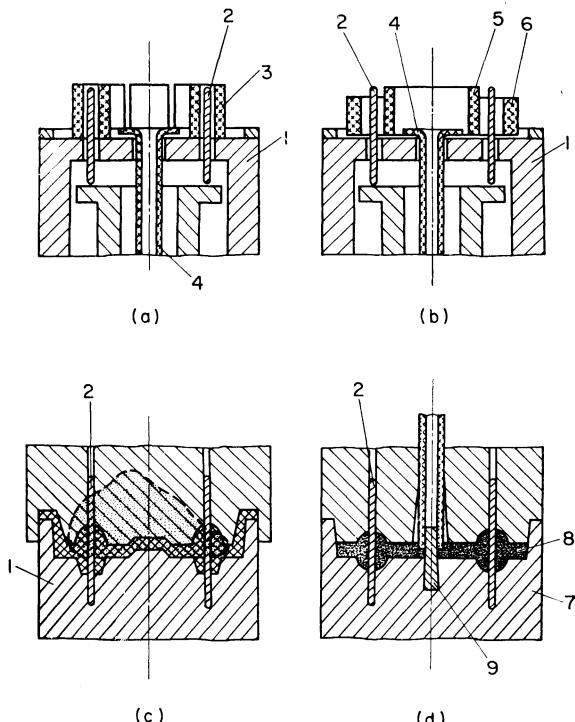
Basic techniques for pressing pin seals, using (a) individual sleeves; (1) holder; (2) pin; (3) glass sleeves; (4) exhaust tube; (b) using concentric glass rings (5, 6); (c) using molten glass drop; (d) using powdered glass; (7) graphite holder; (8) powdered glass; (9) graphite holder for the exhaust tube
